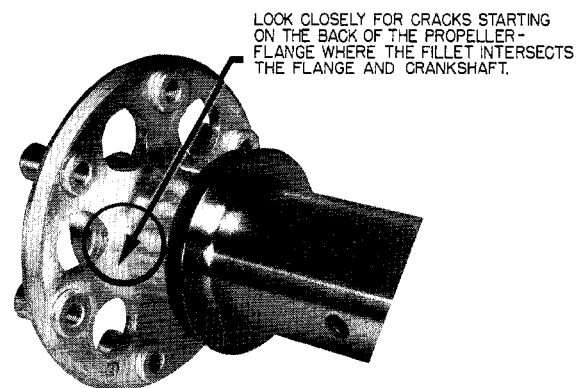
Rear View of Propeller Mounting Flange Showing Area of Lightening Holes.
